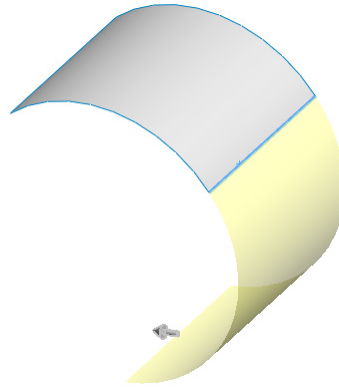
Preview of the extended surface with the Same surface radio button selected
